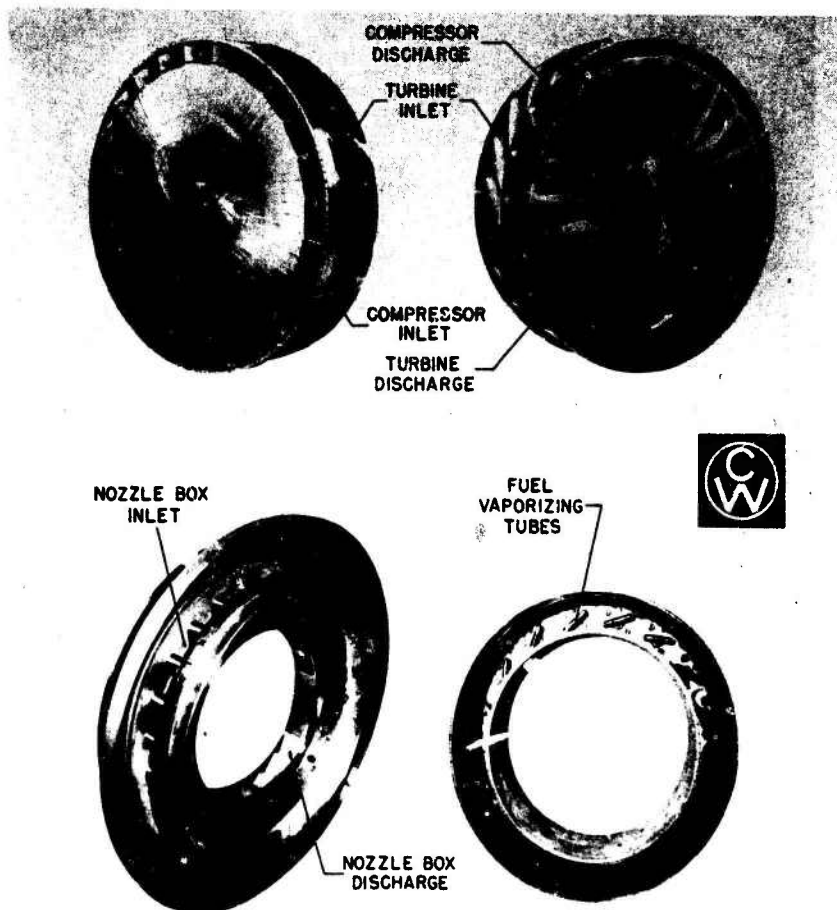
Main Components of WTS-11 Single-Rotor Turbine Engine
